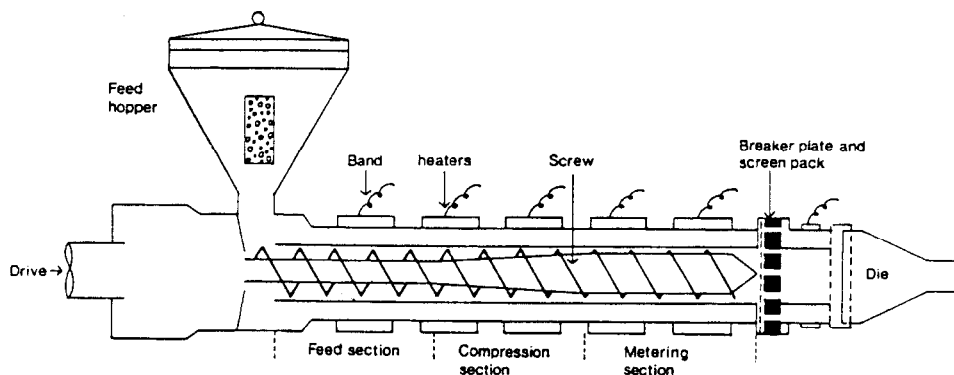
A Single Screw Extruder [Morton-Jones, 1989]. The machine consists mainly of an Archimedian screw fitting closely in a cylindrical barrel with just enough clearance to allow its rotation. Solid polymer is fed in at one end and the profiled molten extrudate emerges from the other. Inside, the polymer melts and homogenizes. Twin screw extruders are used where superior mixing or conveying is important.
